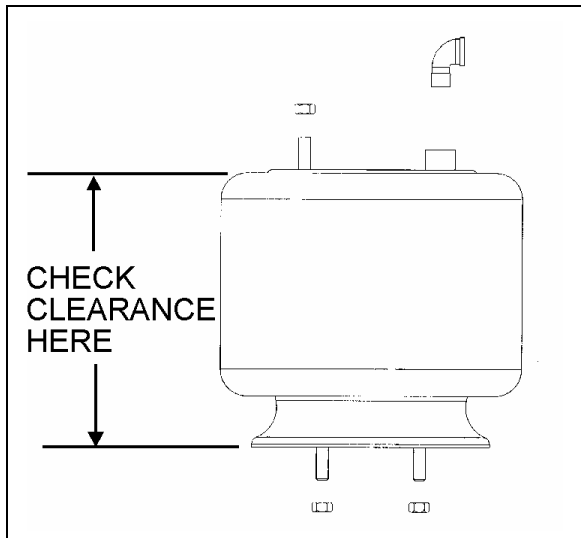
TYPICAL AIR SPRING CLEARANCE 16058
